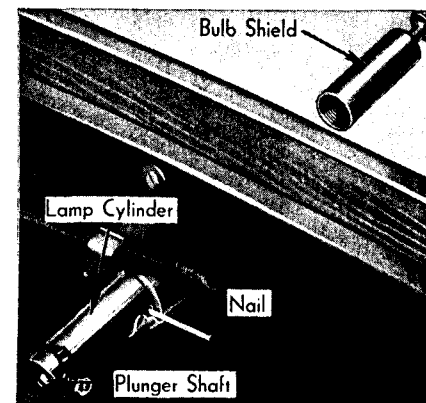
The bulb shield may be unscrewed after the holes in the lamp cylinder and the plunger have been lined up and a nail inserted to hold the plunger.
